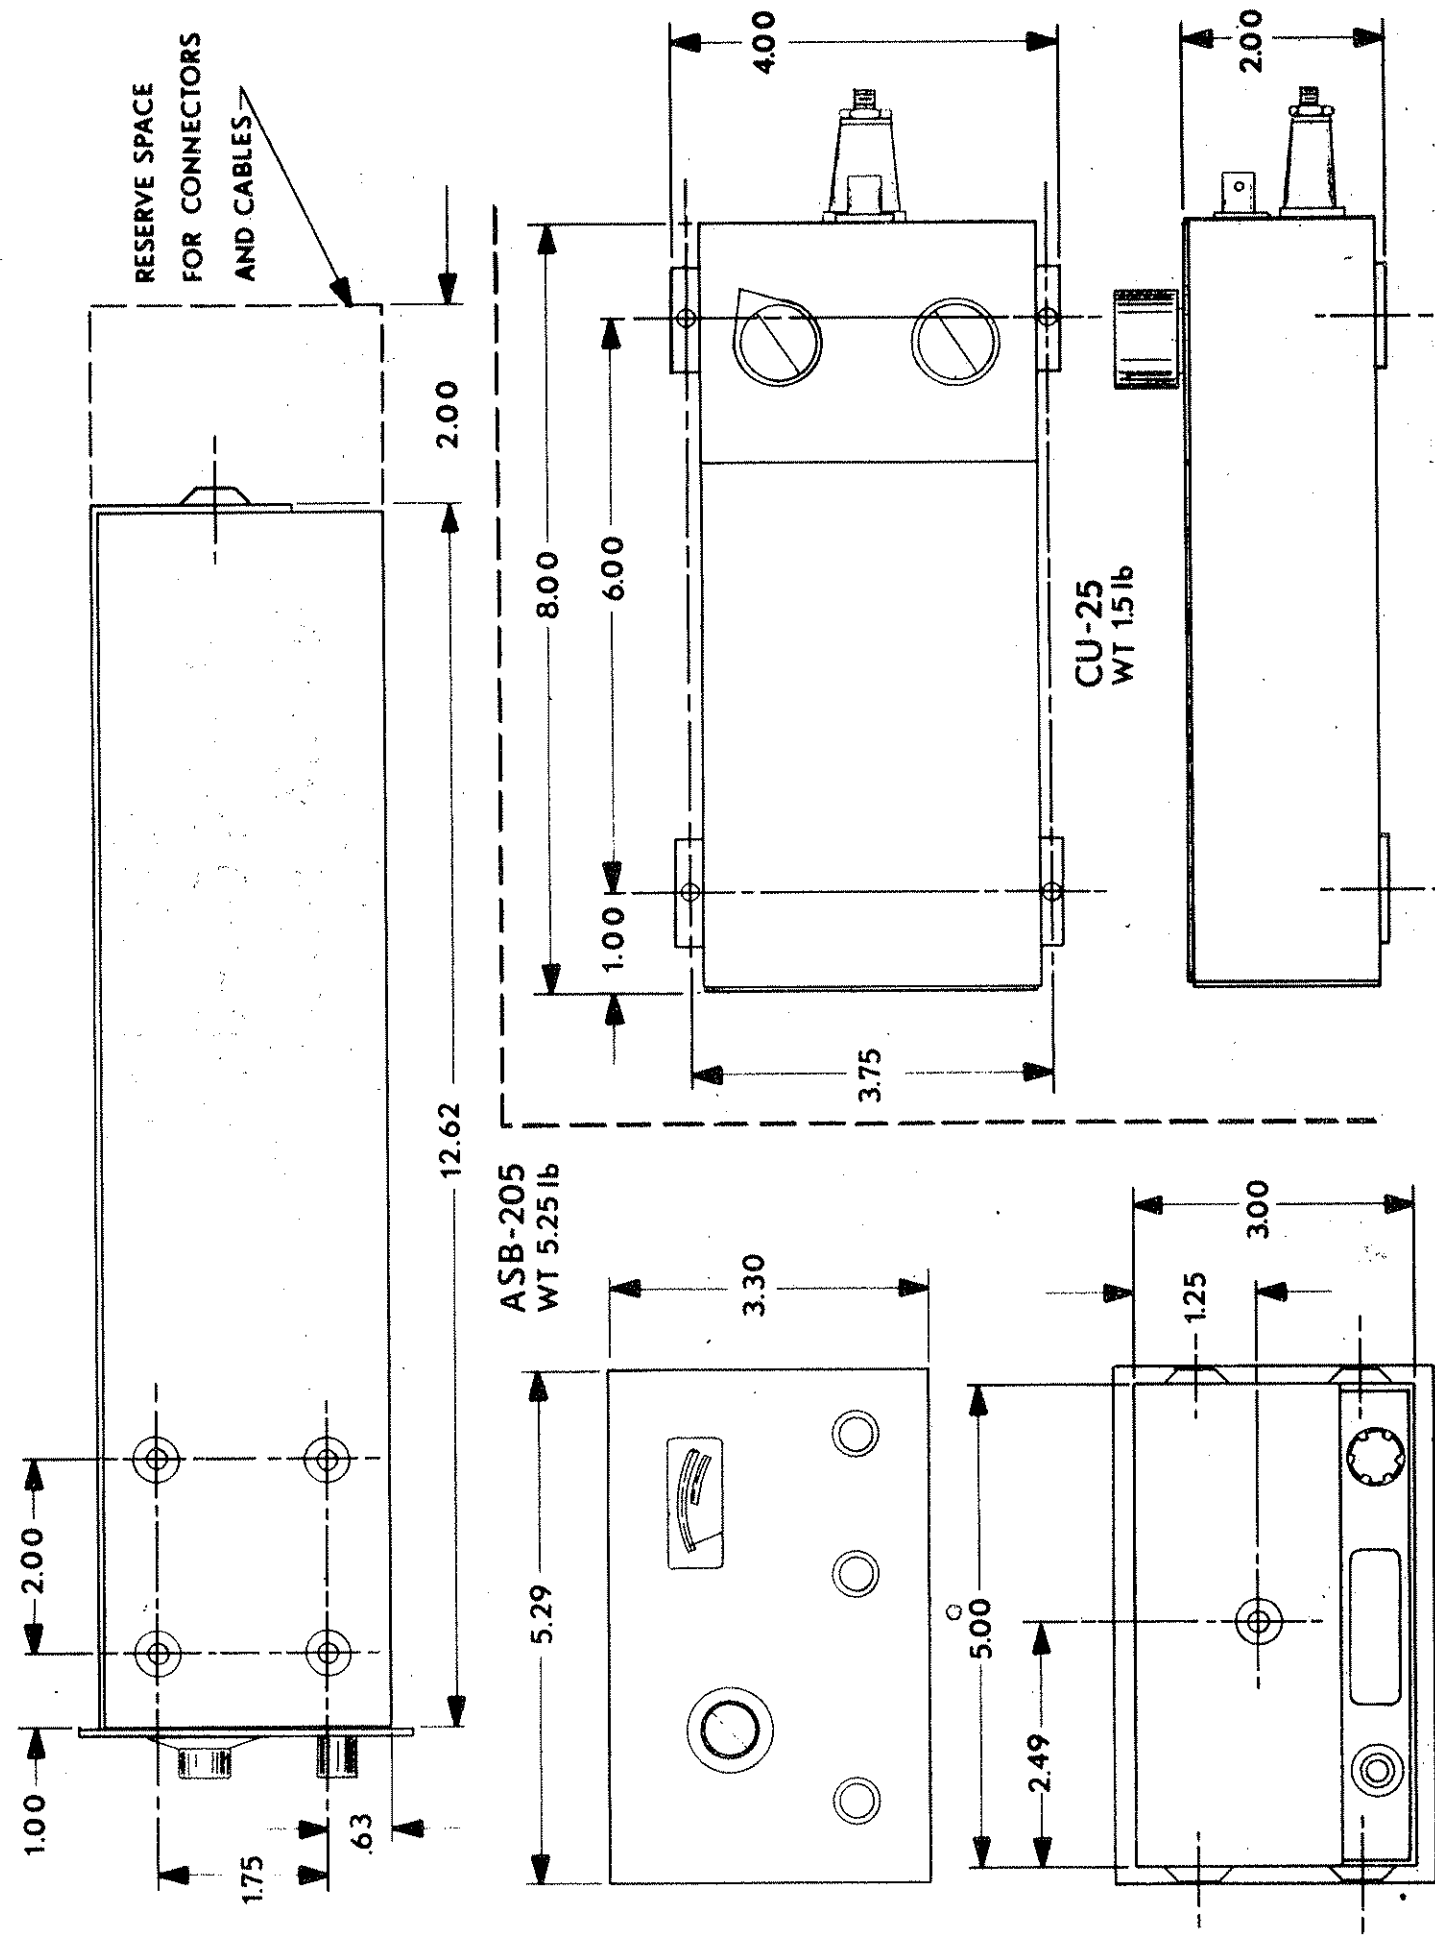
OUTLINE AND MOUNTING DIMENSIONS
